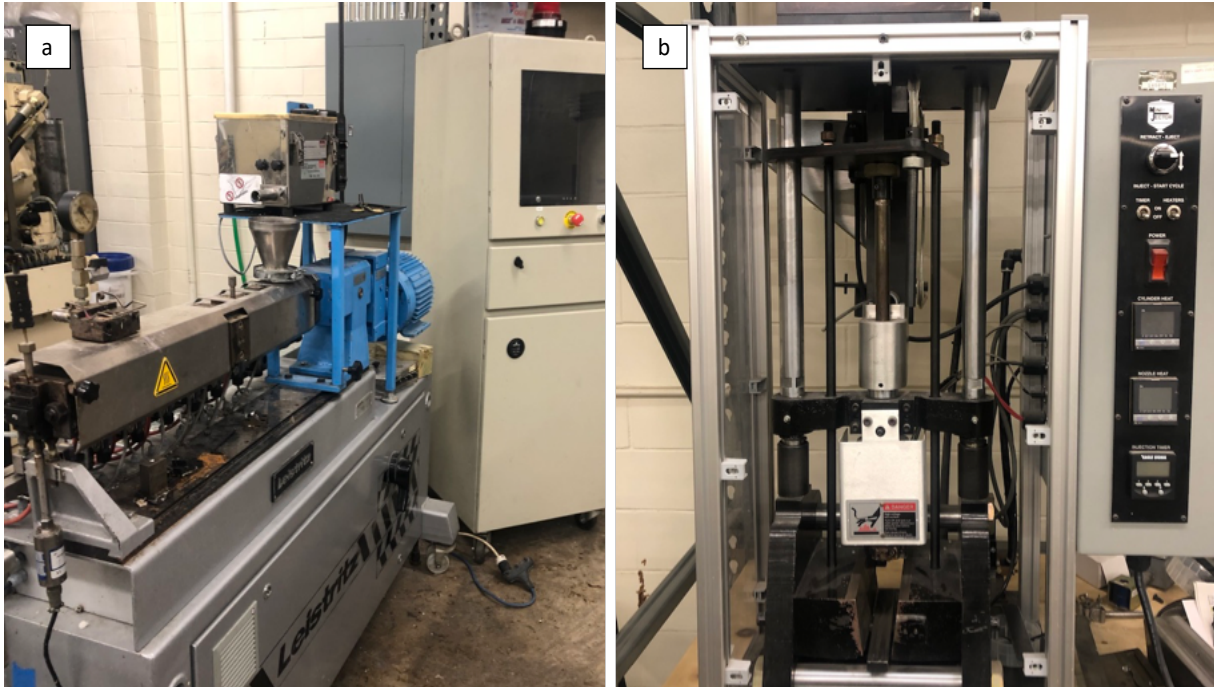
a) Twin-screw extruder b) Mini-Jector injection molding machine.
